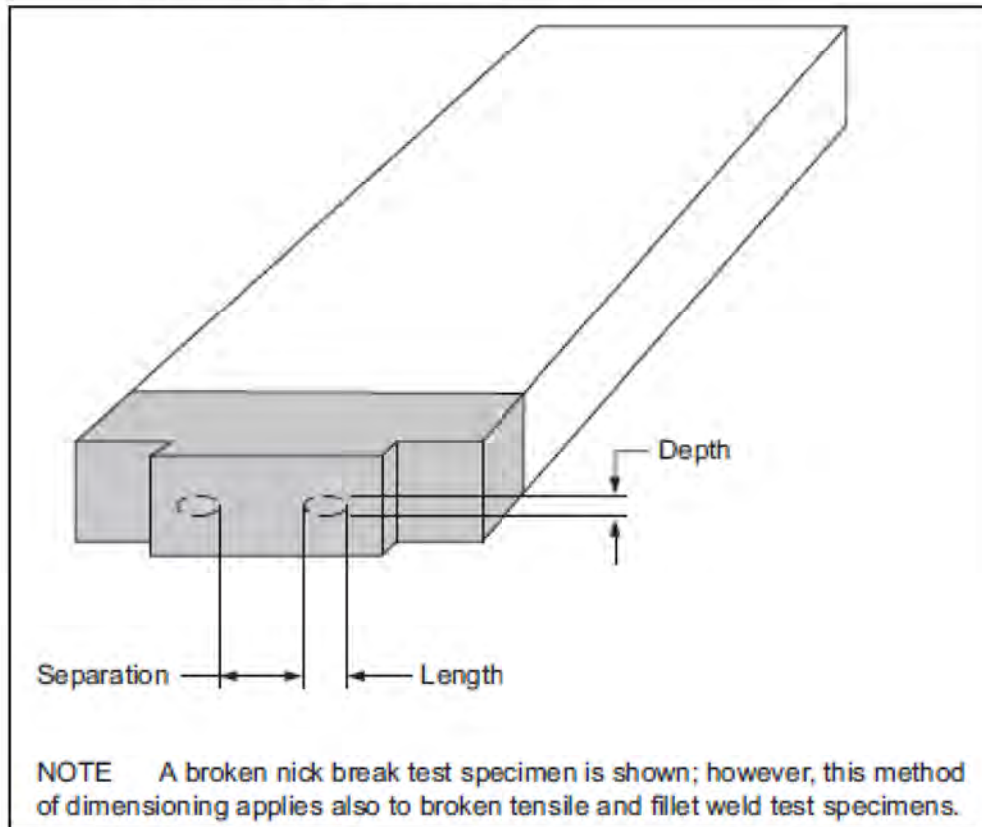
Dimensions of Indications in Nick-Break and Tensile Test Specimens
